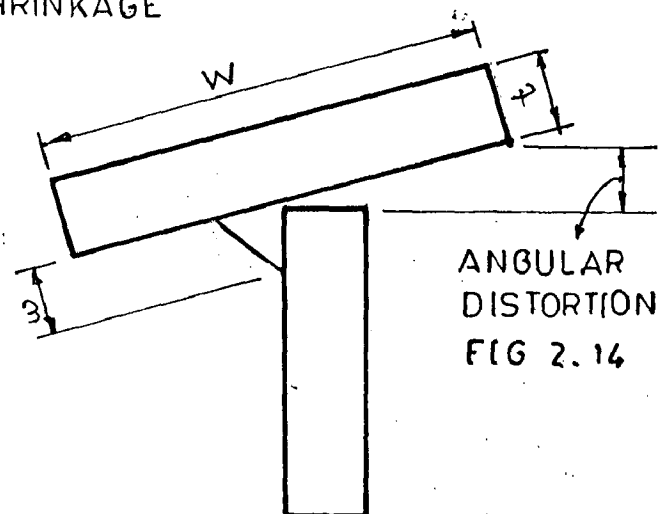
ANGULAR DISTORTION IN FILLET WELD
